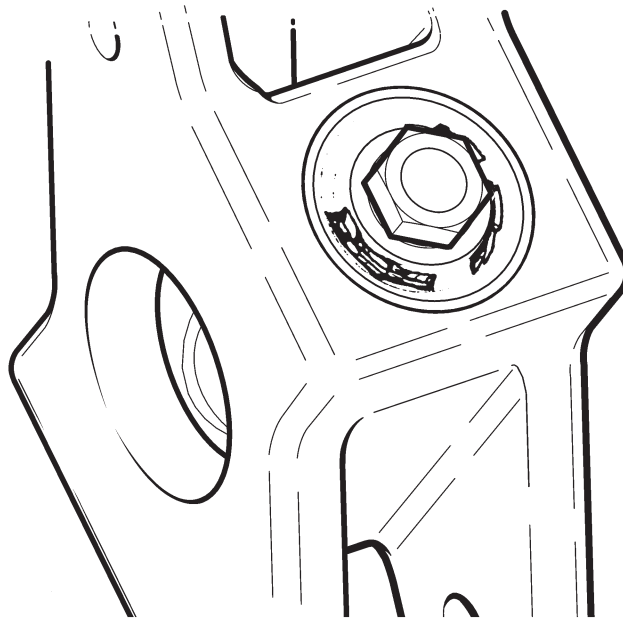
ELASTOMERIC BEARING DAMAGE
